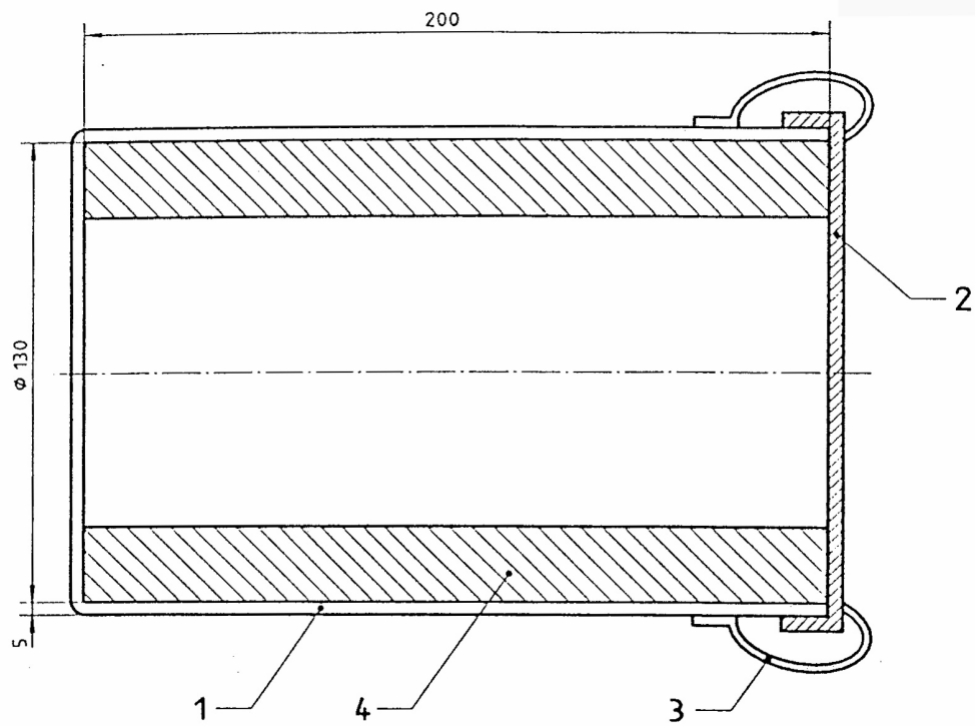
Drawing of the Tumbler Drum used in Reduction-Disintegration Test (Dimensions are in mm.)
